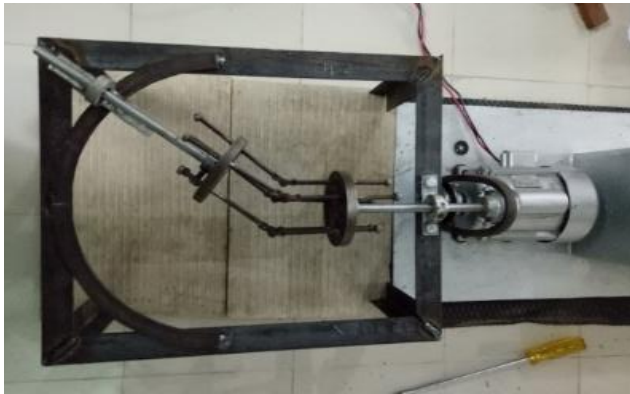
Fabricated hub, links ,assembled multiangular power transmitting arrangement with 0.25hp motor
